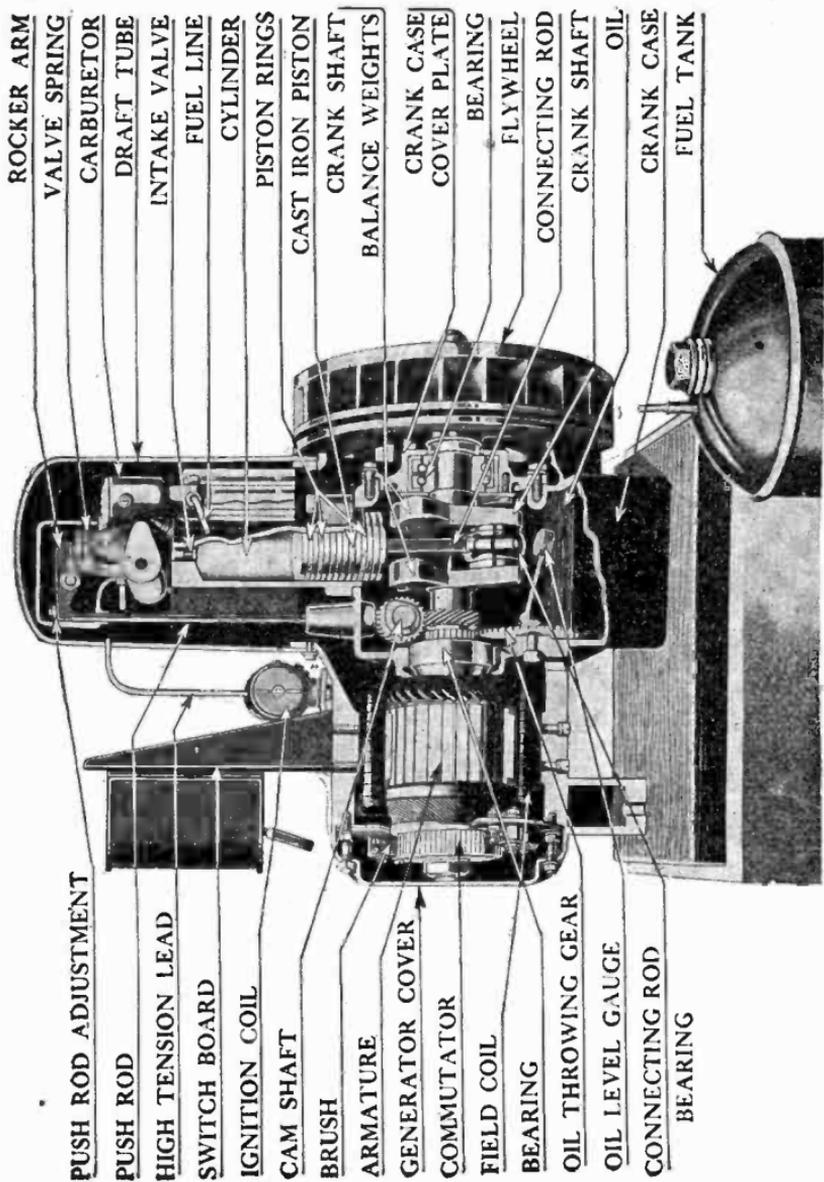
,774.—Delco single cylinder engine and direct connected dynamo. Sectional view showing parts. The fly wheel with its air vanes serves also as a blower to air cool the engine.
